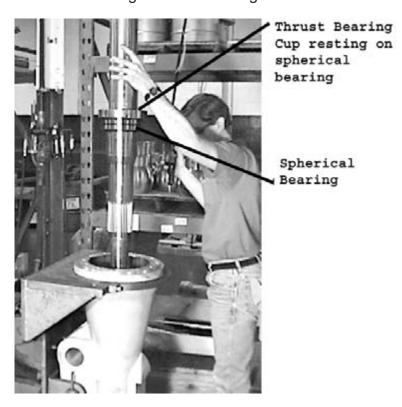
Lower the Propeller Shaft Assembly, Seat the Shaft In the Bearing Race
